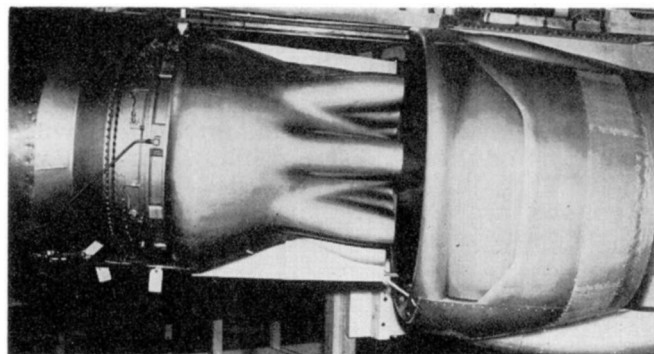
Mockup of production suppressor-thrust brake (ejector fully extended)
